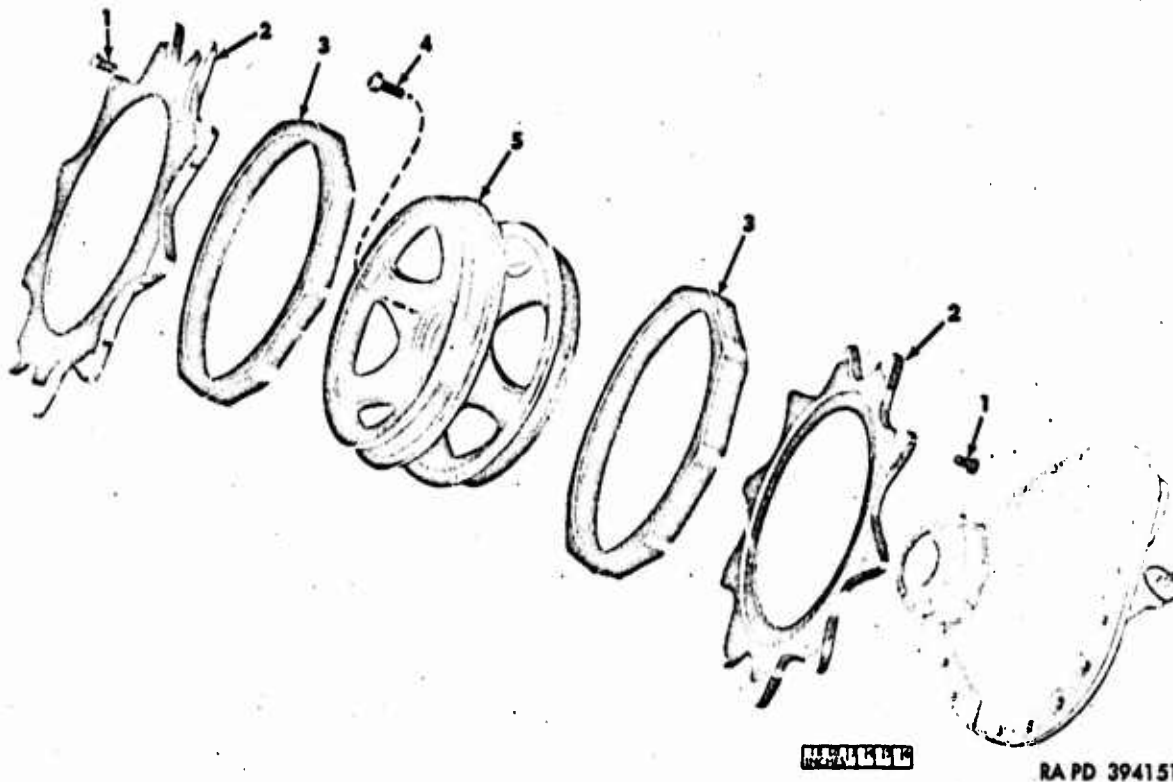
DRIVE SPROCKET-PARTIAL EXPLODED VIEW.
